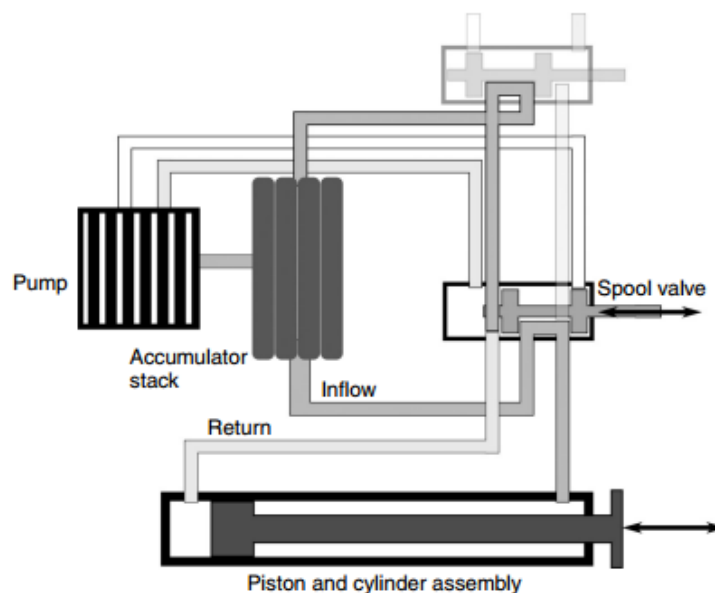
Schematic diagram of the oscillation mechanism of a hydraulic-type LFW machine. The spool valve in the figure oscillates in and out, which allows hydraulic fluid to be alternately forced into the top and bottom of the cylinder and piston assembly, which in turn creates the reciprocating motion. The tooling to hold the parts to be welded is attached to the piston<sup>24</sup>.
